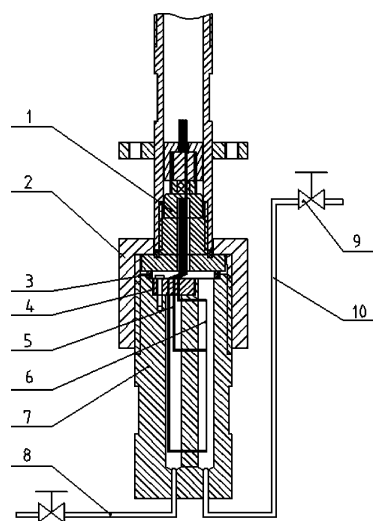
Hot-wire assembly: 1, seal connector; 2, nut; 3, Cu O-ring; 4, ceramic flake; 5, Ta rod; 6, Ta wires; 7, pressure vessel; 8, inlet; 9, valve; 10, outlet.
